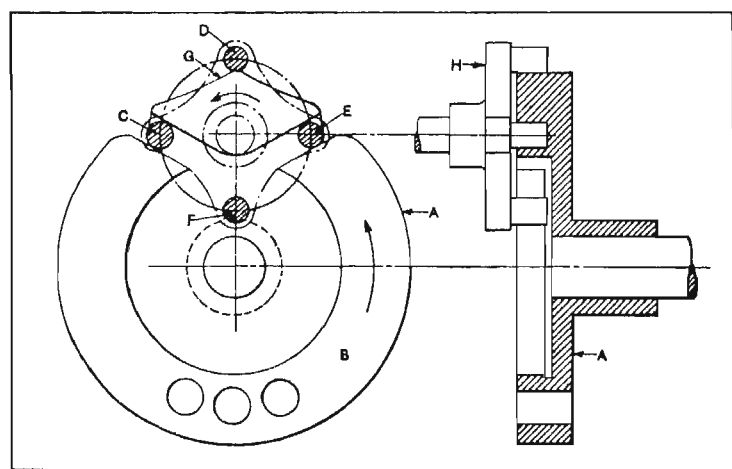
Rapid-acting Intermittent Gearing of Moving Picture Projector
